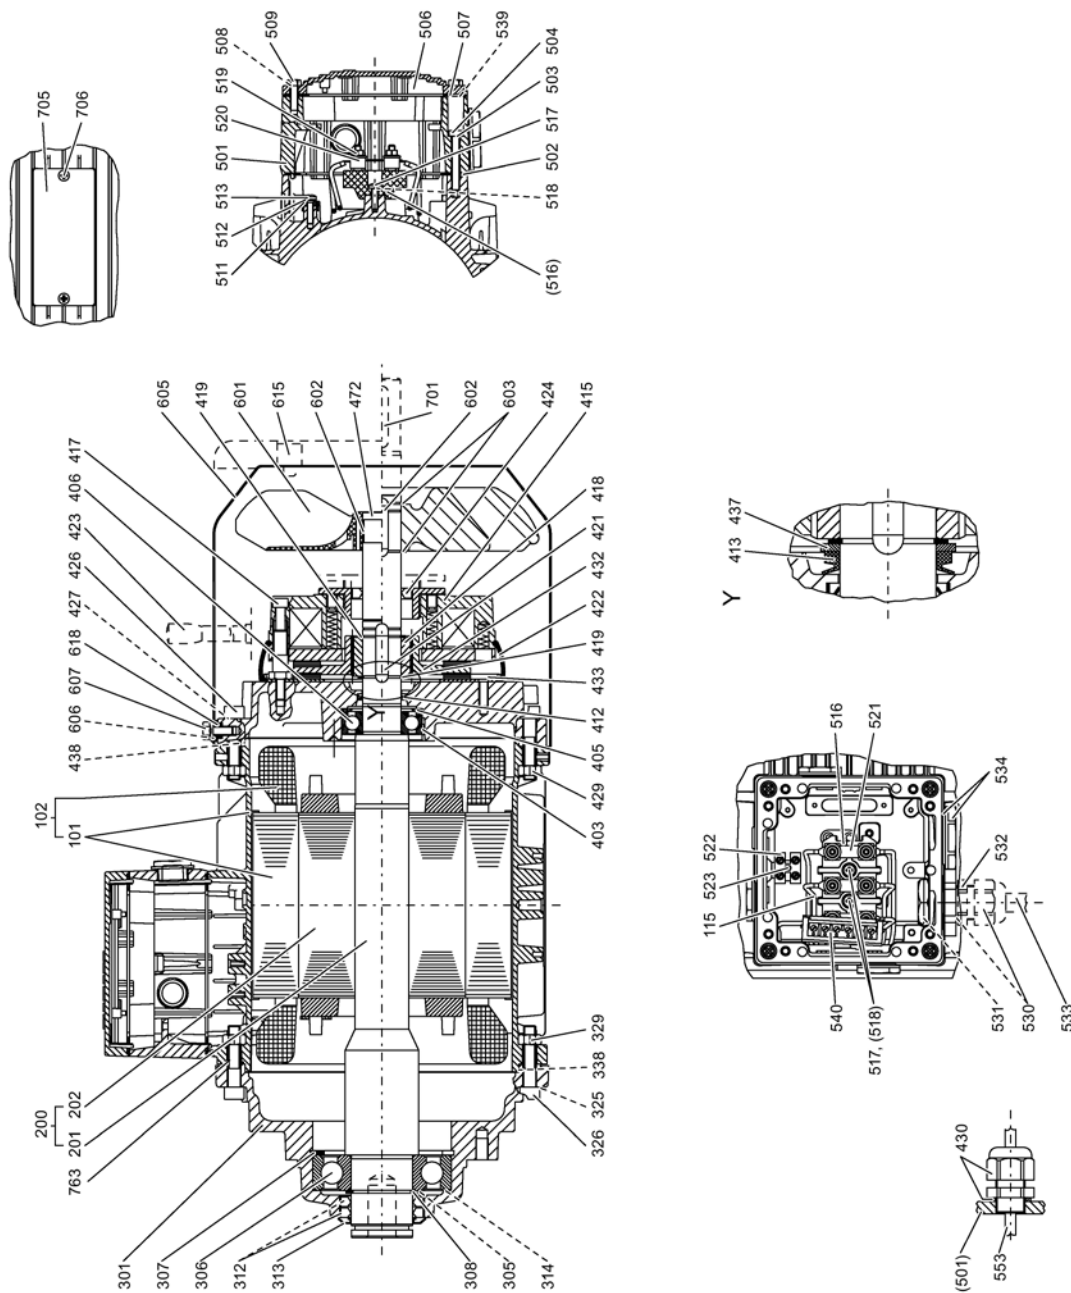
MODULOG brake motor sizes LA100 - LA160
